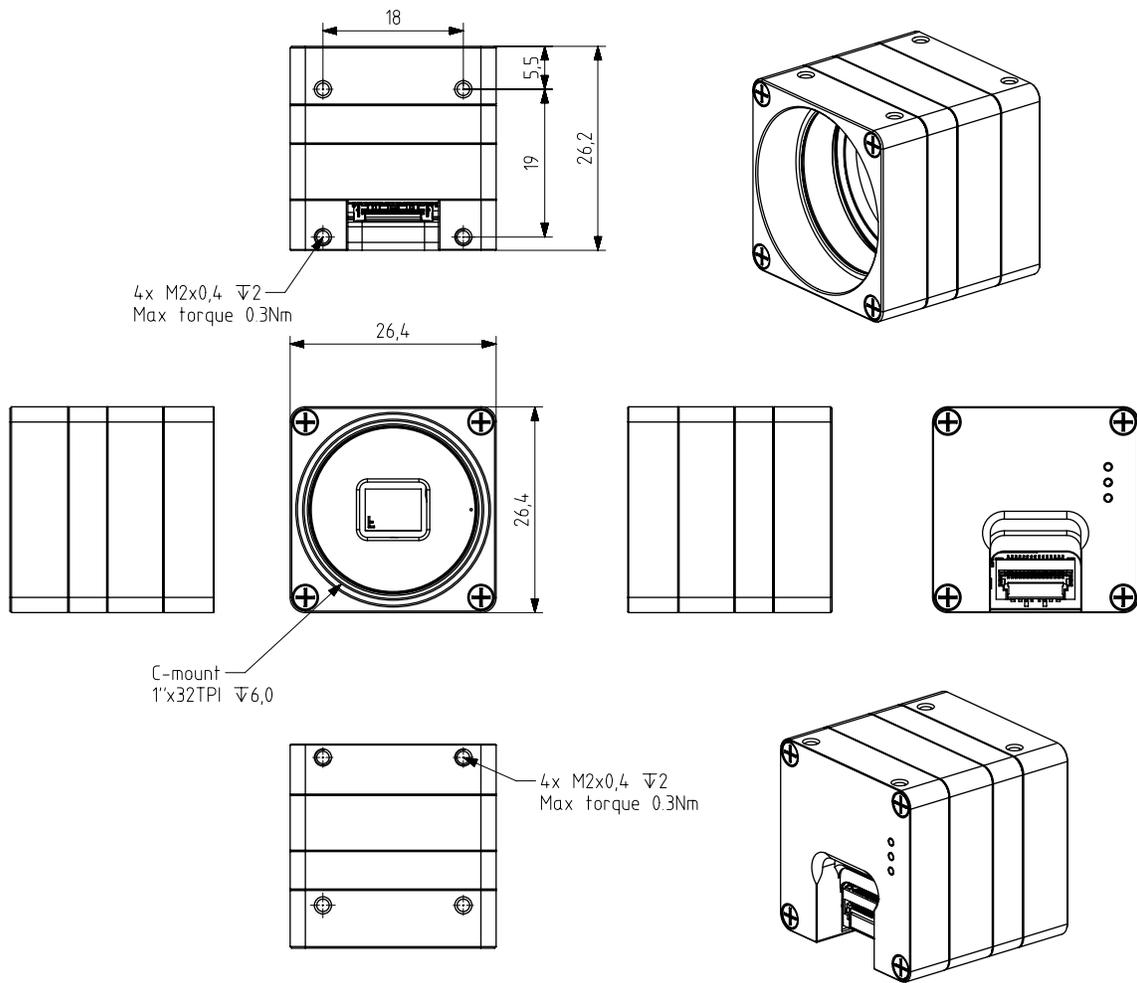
Dimensional drawing of MQ013xG-E2-FL
